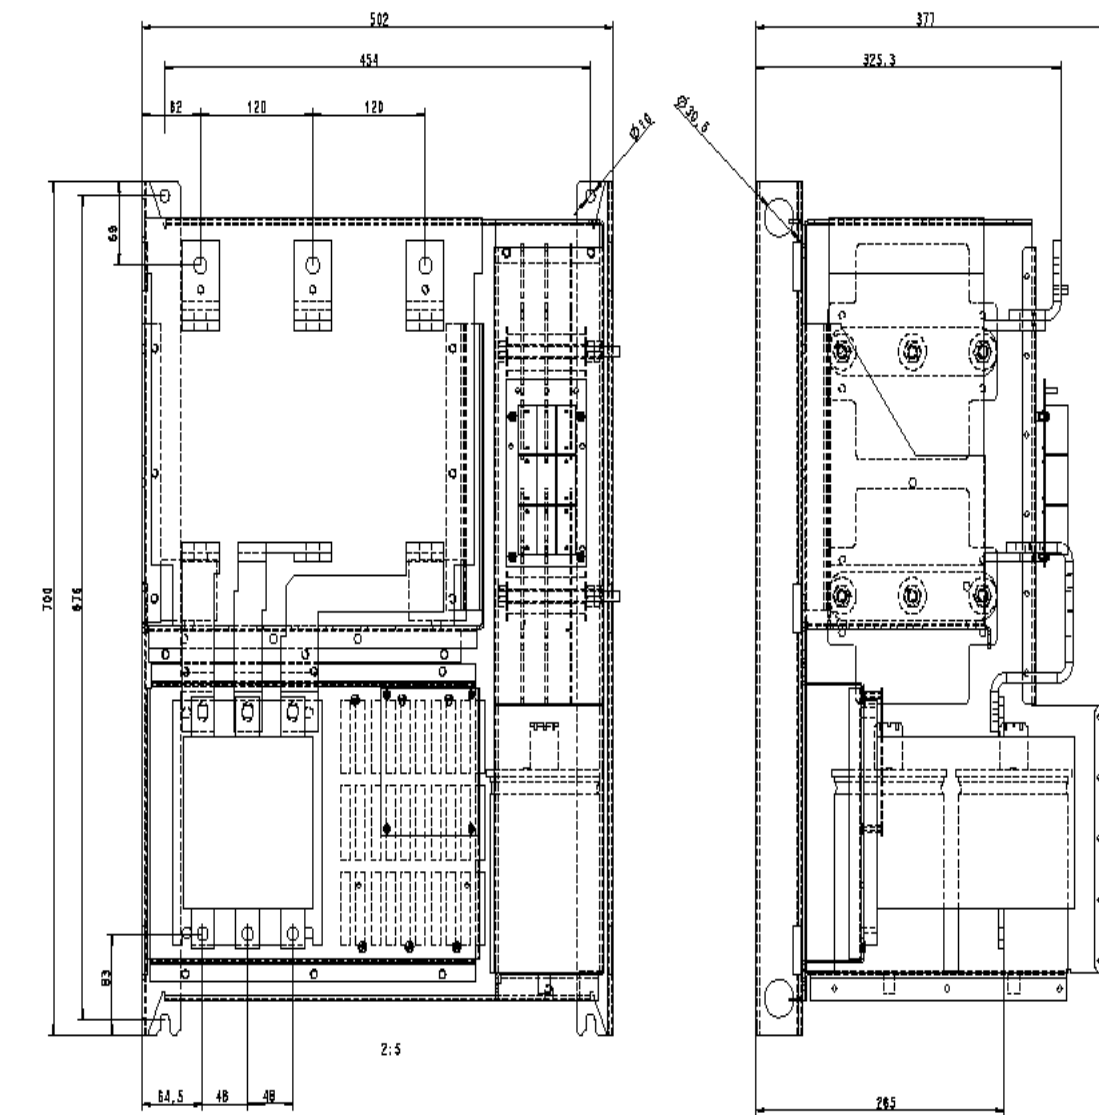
Example of construction type J: Mounting dimension AFE basic mains module with CleanPower filter
